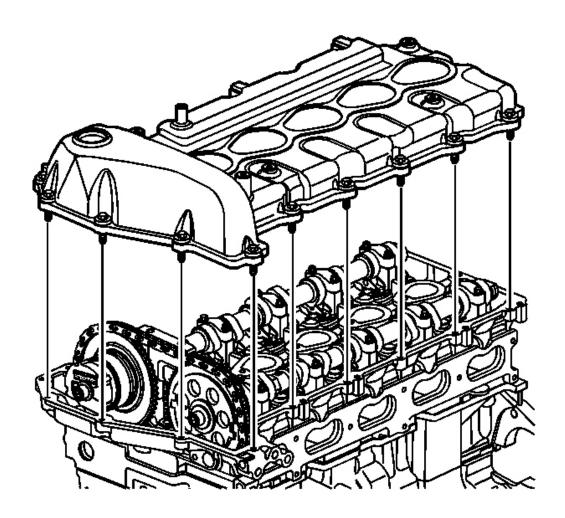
View Of Camshaft Cover Courtesy of GENERAL MOTORS CORP.
